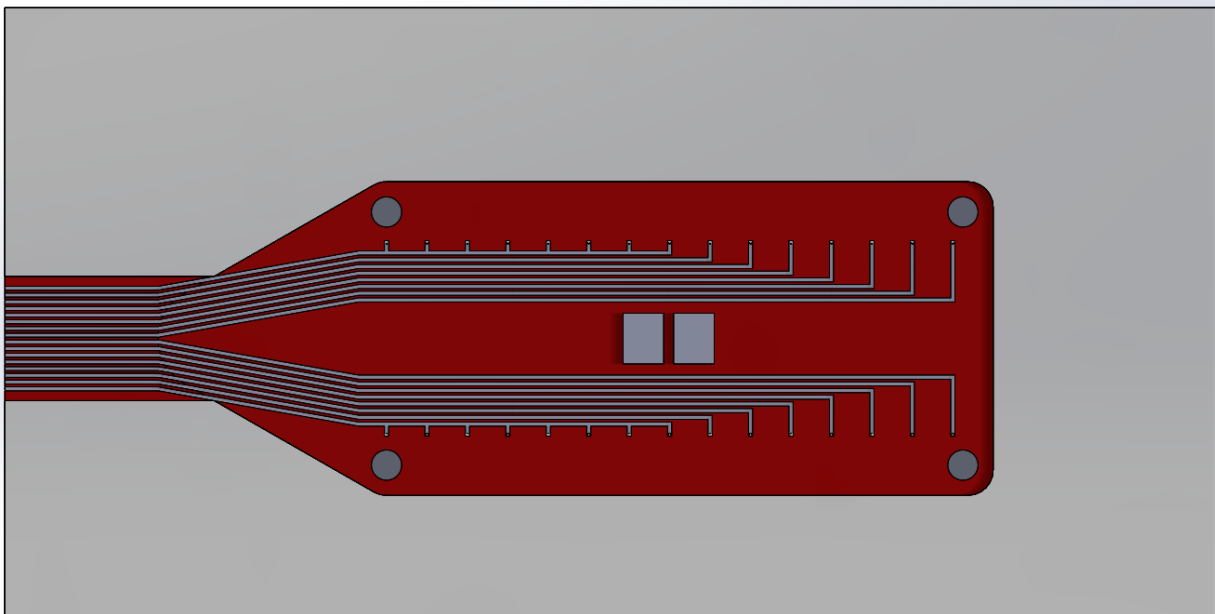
The red area is the cavity that was milled to a depth of 1 mm with a 1.25 mm diameter end mill to create the base structure of the secondary mold.
